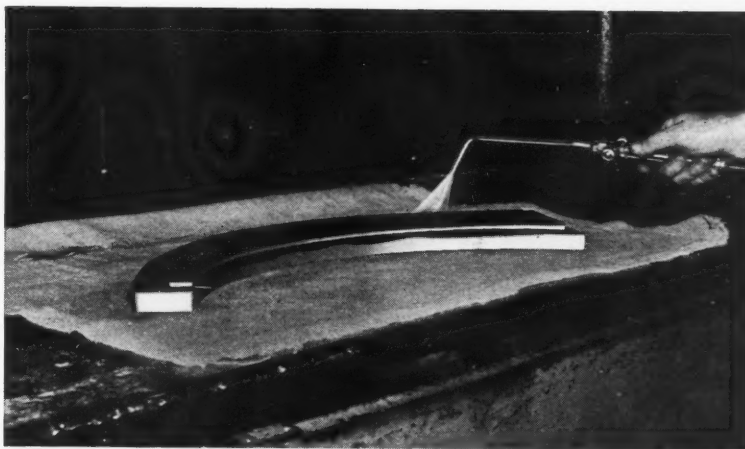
The hot titanium part and form block are covered with an asbestos sheet to protect the rubber pad on the hydraulic press in which the part is formed
